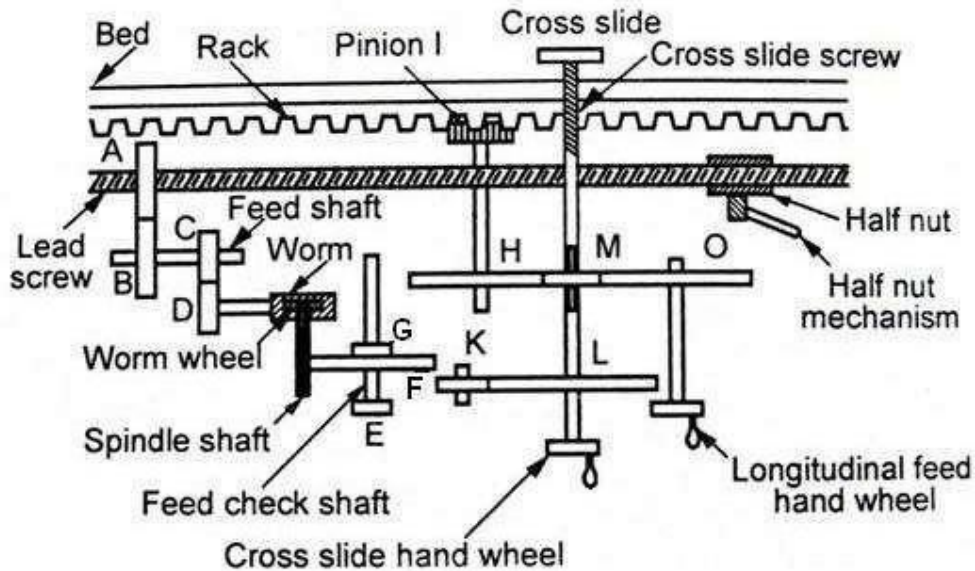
shows the schematic arrangement of apron mechanism.
